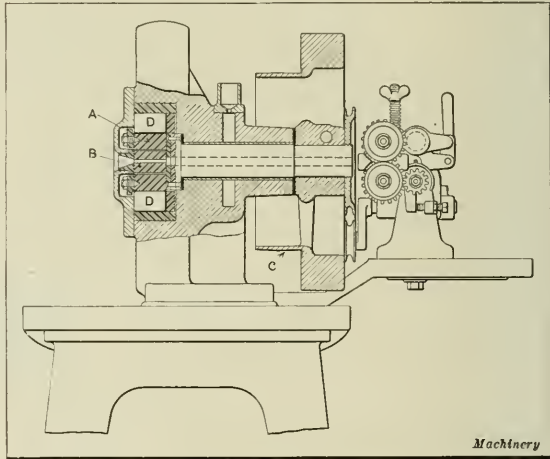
Longitudinal Section through Head of Langelier Swaging Machine
